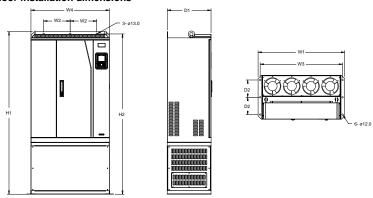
Floor installation diagram of inverters of 660 V, 250 to 350 kW
